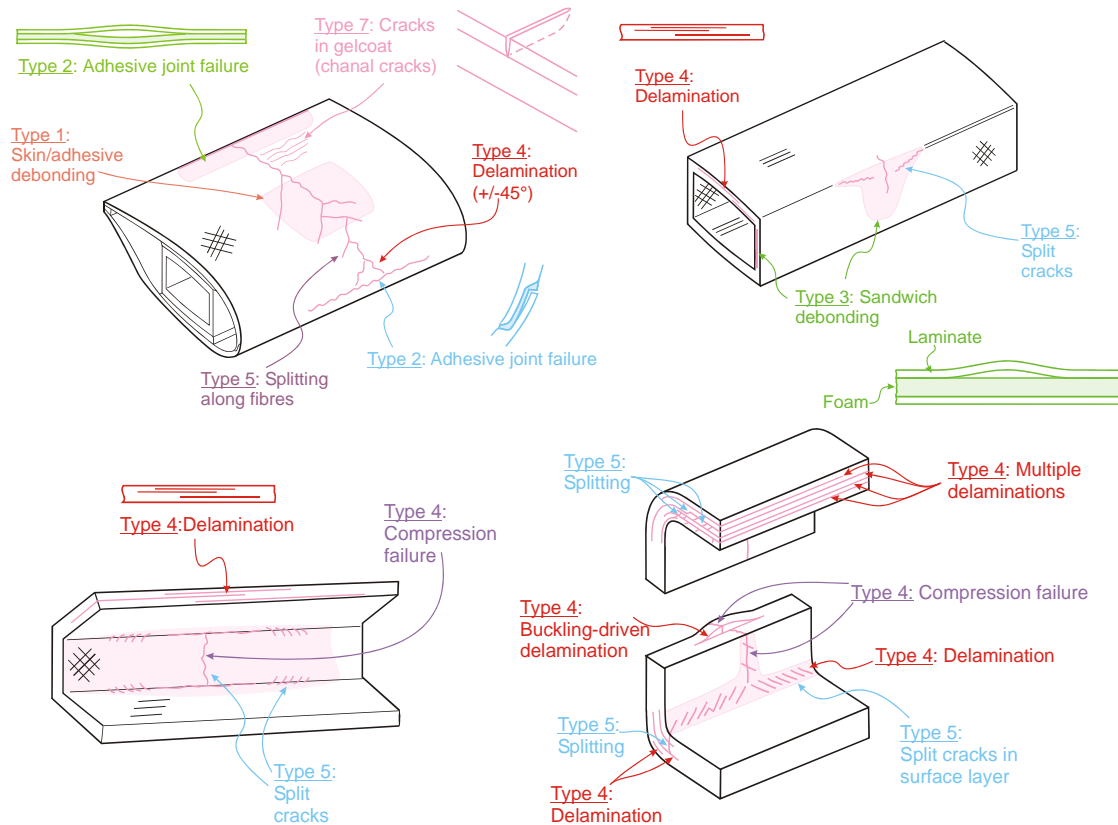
Sketches of observed failure modes in a wind turbine blade purposely tested to failure [15]; damages in the aershell and box girder.
